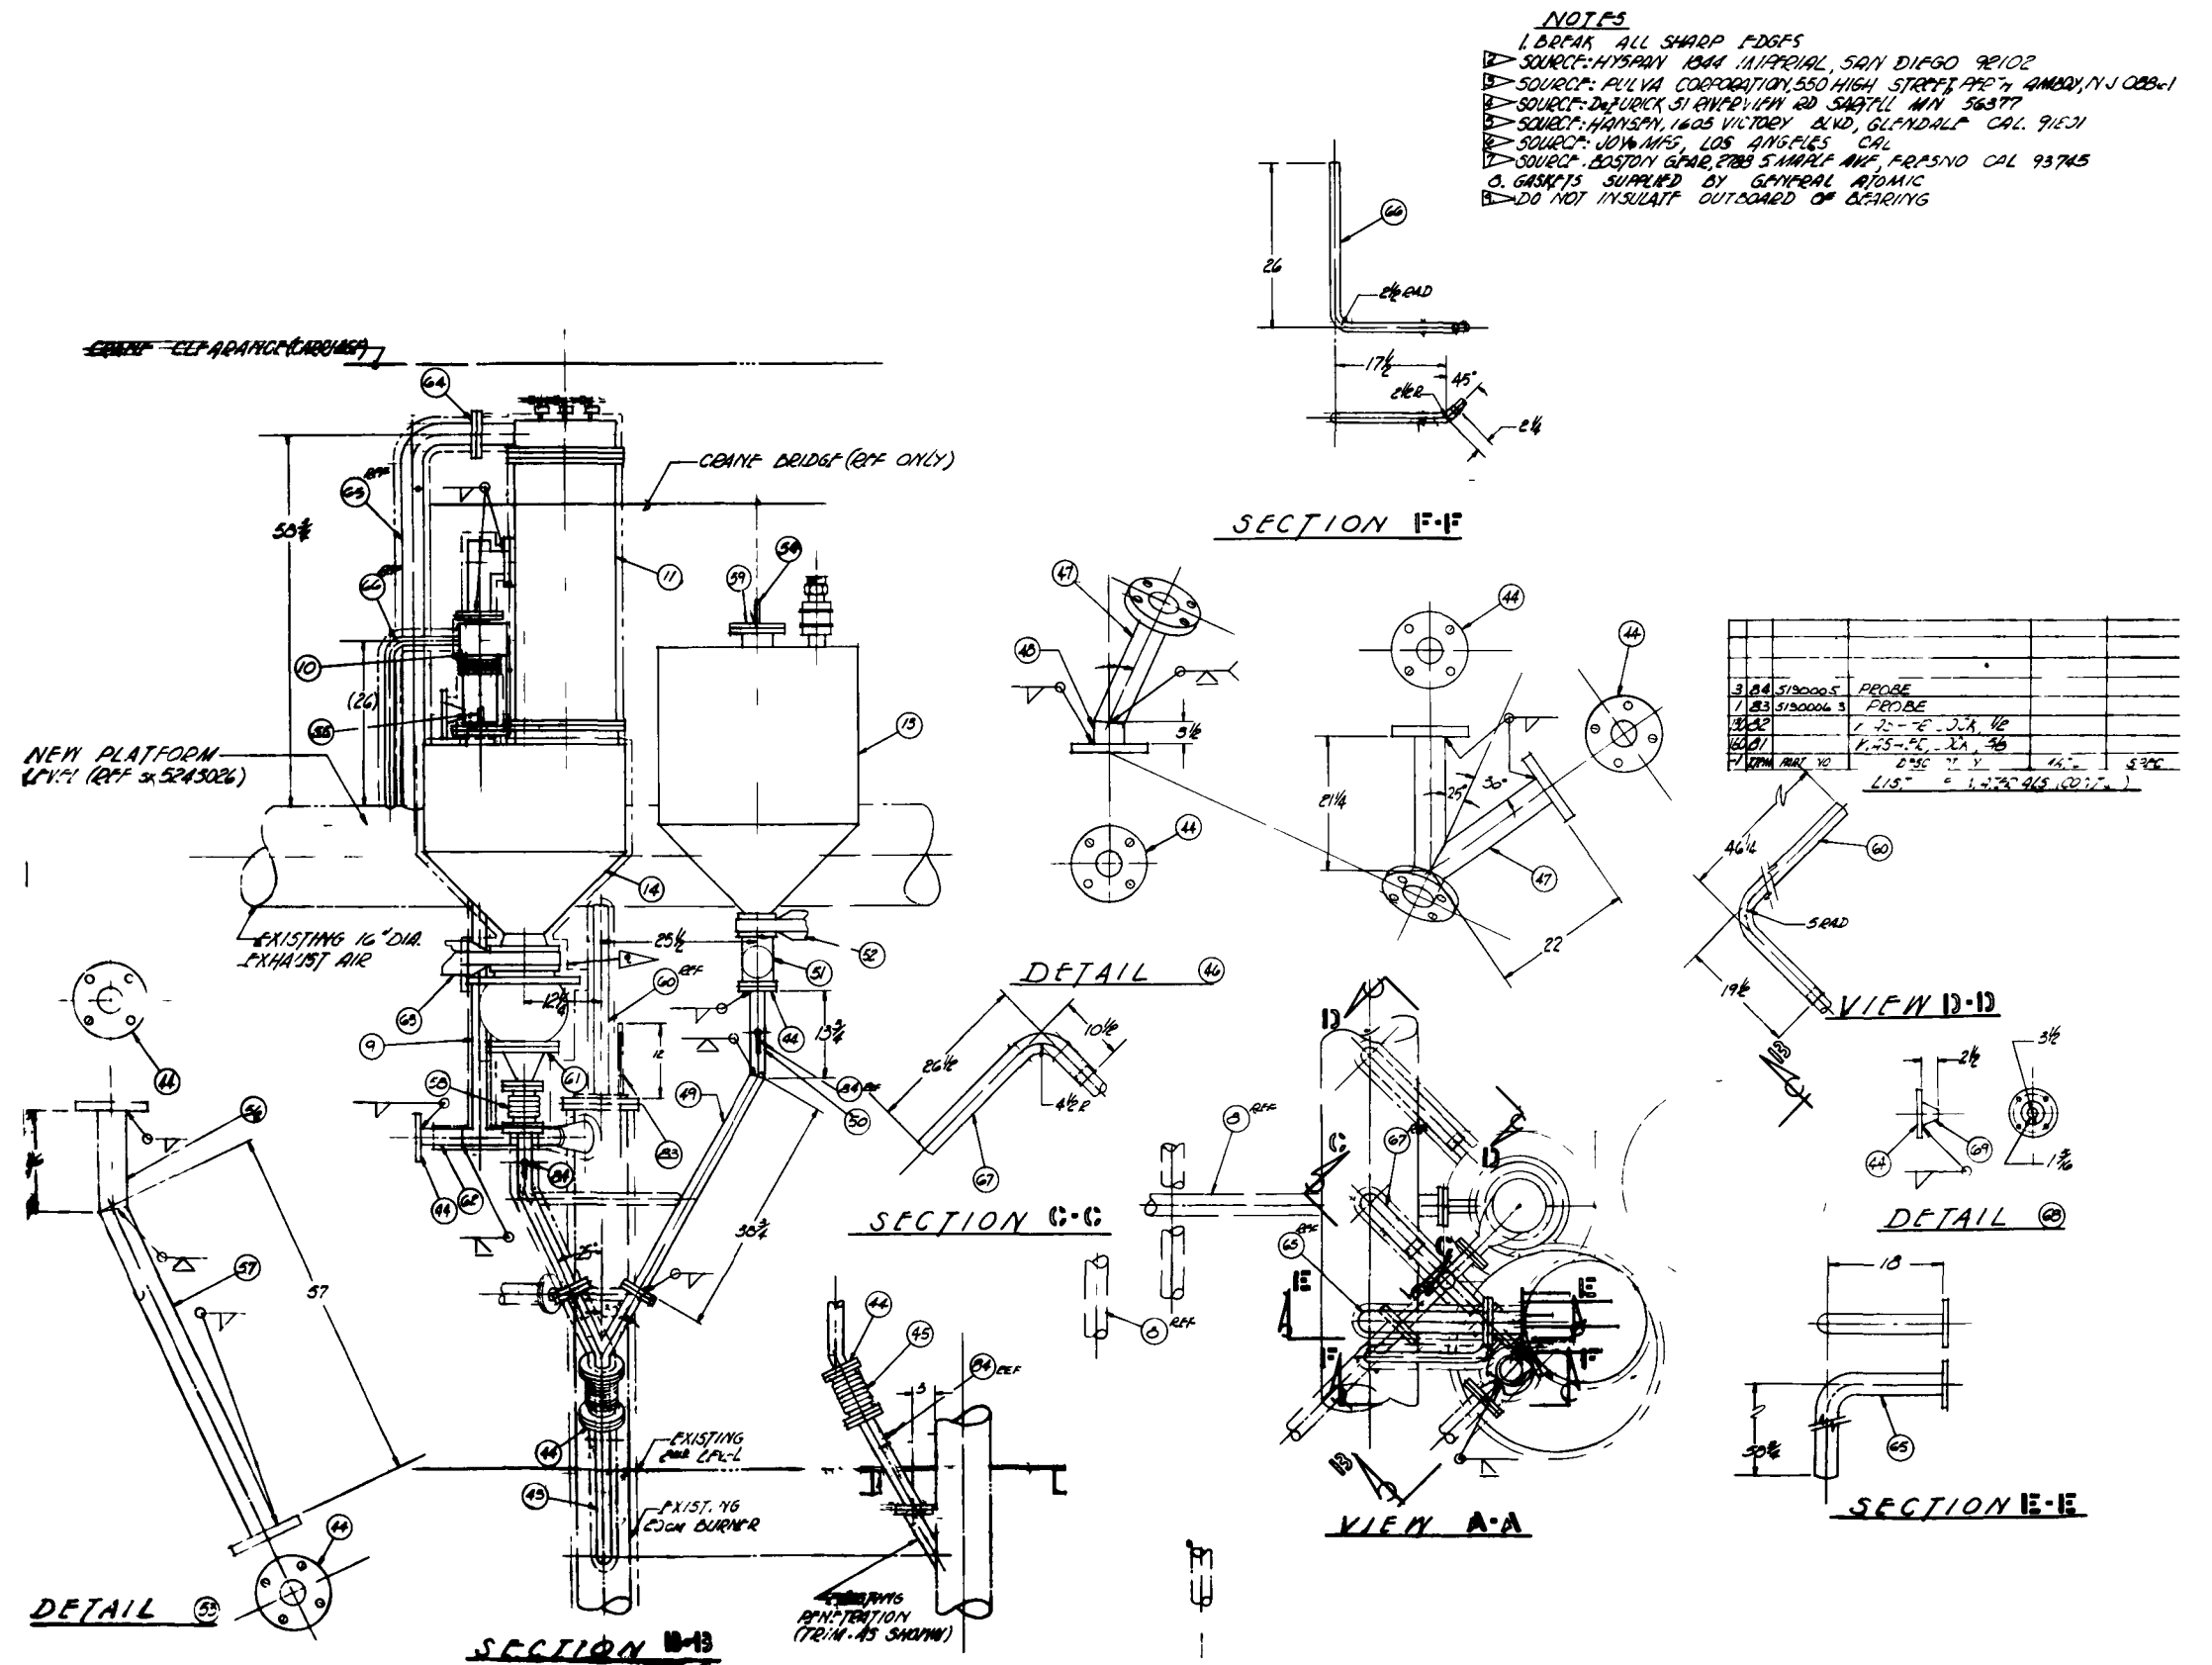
Burner and shroud installation (Sheet 2 of 2)
